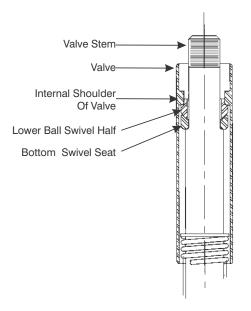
Valve Internal Shoulder Seats on Ball Swivel Lower Half.
